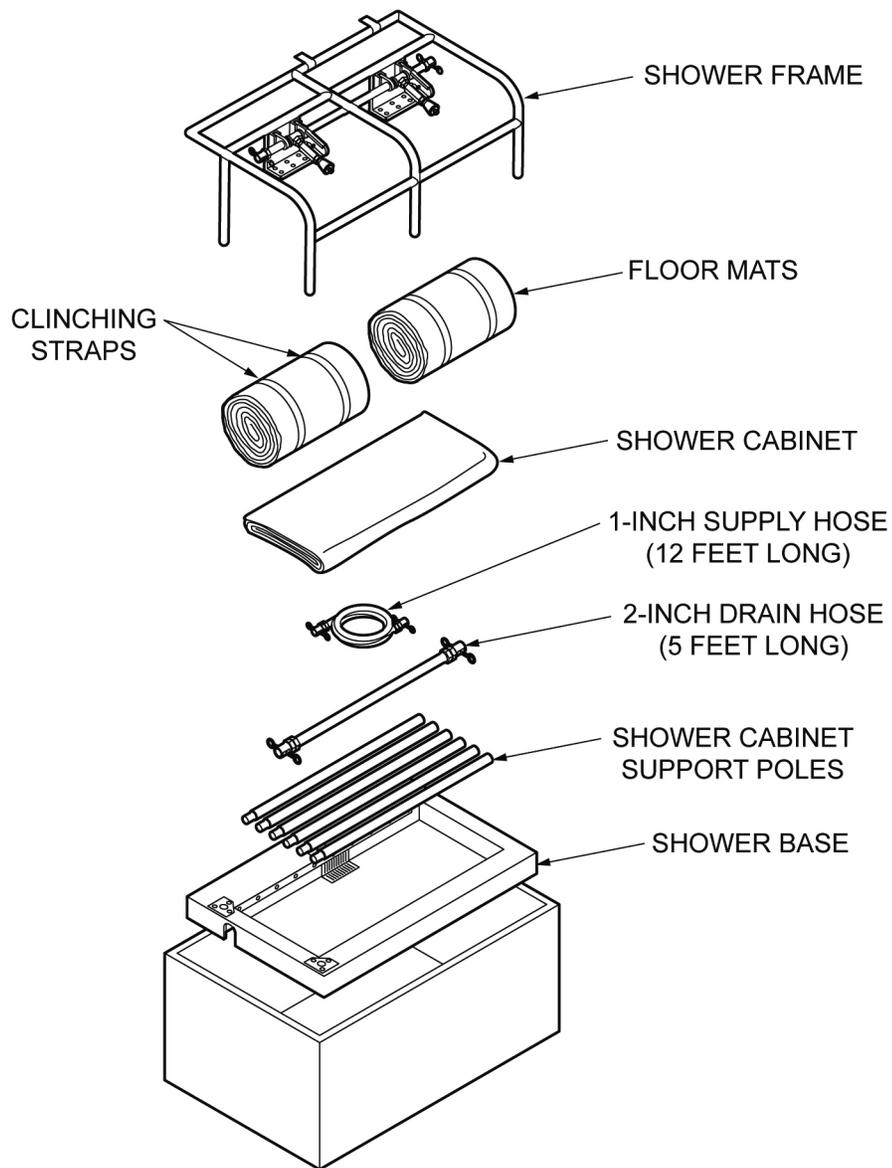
Packing the 12-Head Shower (Sheet 4 of 6).
